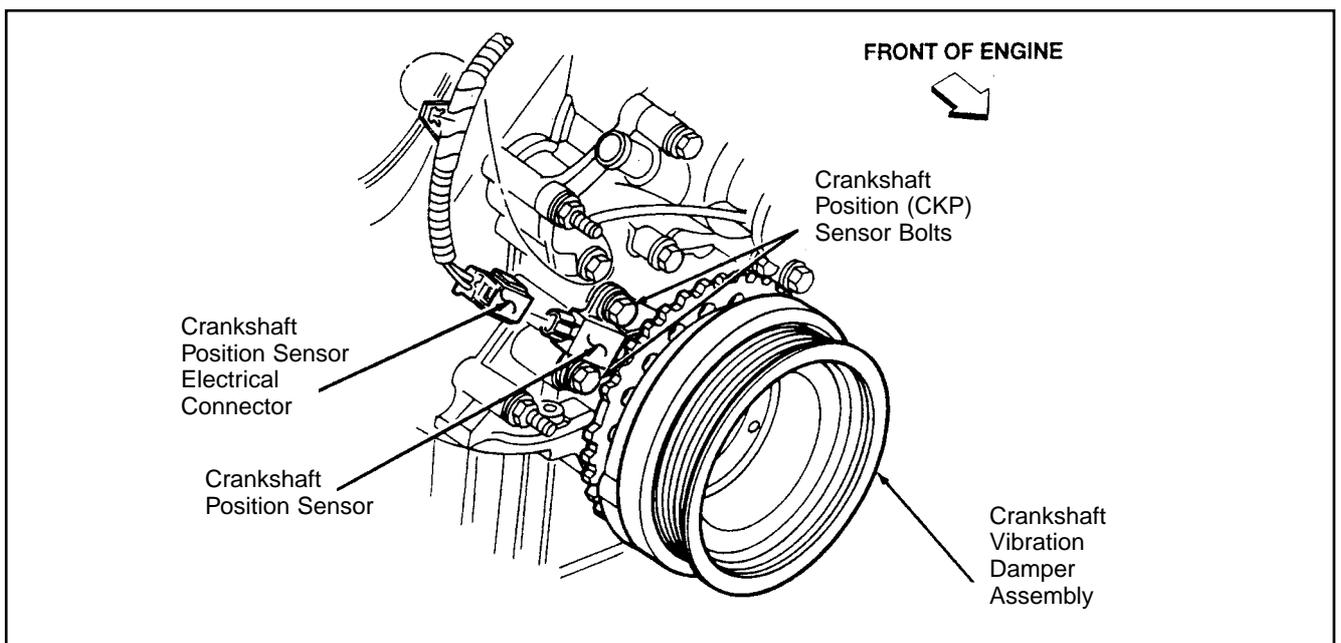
Crankshaft Position Sensor - Eight Cylinder
